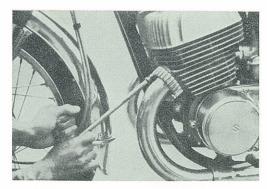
Removing exhaust pipe clamp fitting bolts
